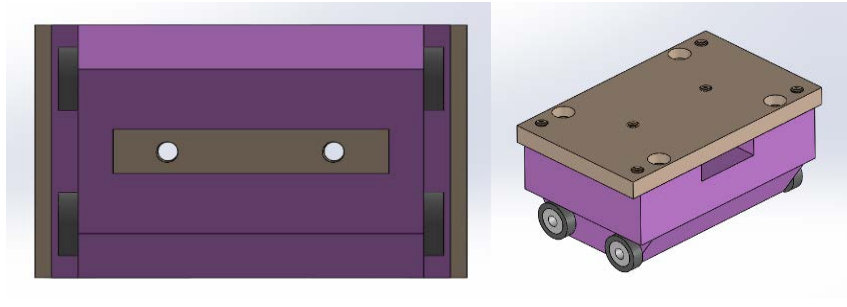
6 Assembly drawing of sensor case inside sensor unit-1
